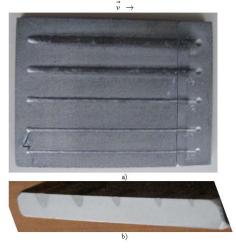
Welds on steel plate a) Plate surface b) Cross-section for welds
